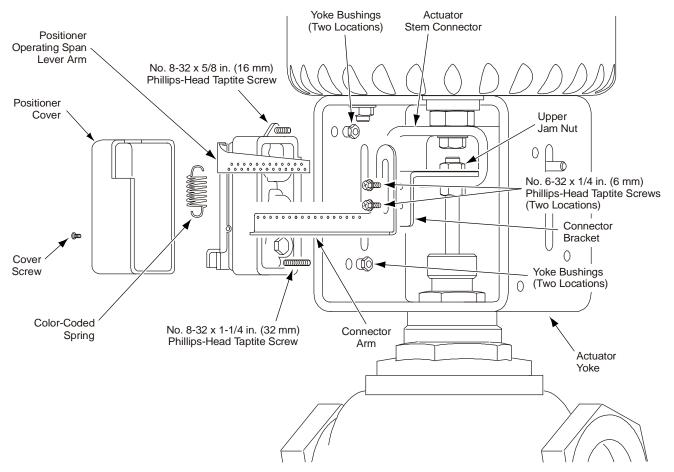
Mounting the V-9502-95 Pneumatic Valve Actuator Positioner
